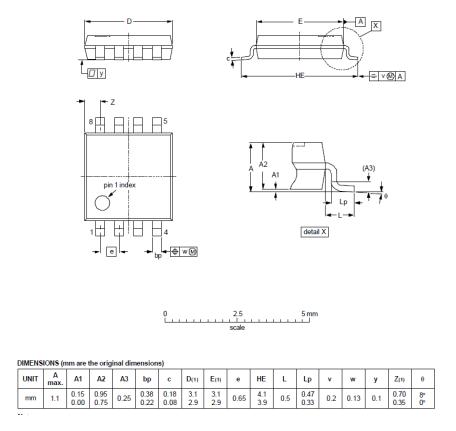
TSSOP8 Package Shape and Dimension in millimeters and (inches)
